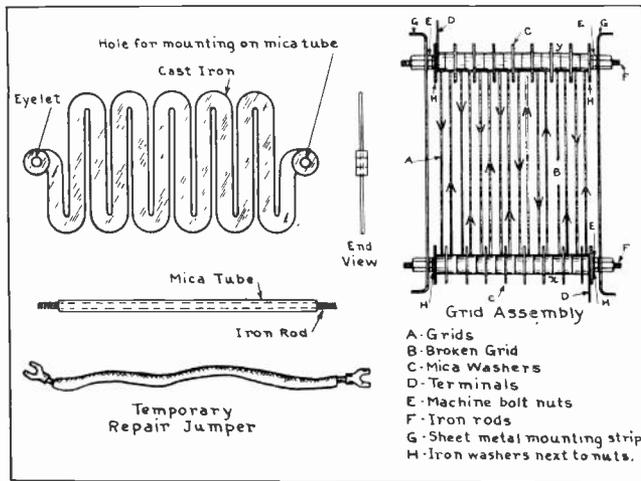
Sketches showing construction of iron grid type secondary resistors for slip-ring motors. Also note the jumper used for making temporary repairs to open circuited units.
